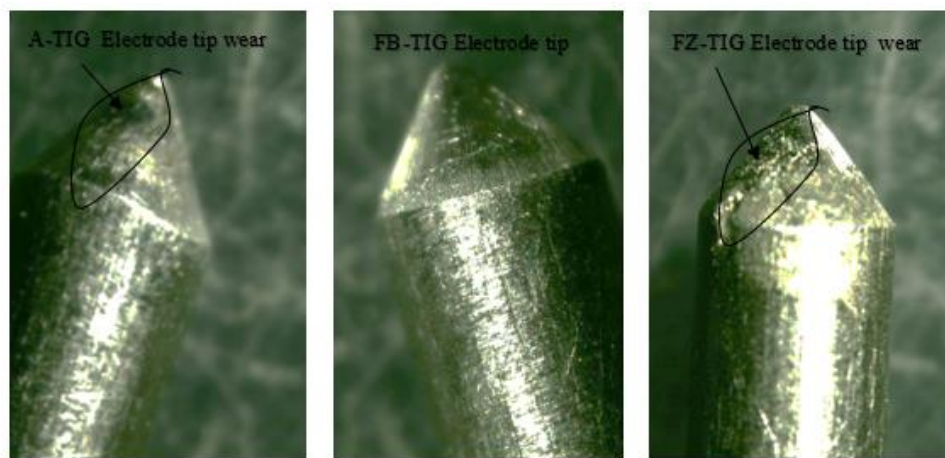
Electrode tip appearance after A-TIG, FB-TIG and FZ-TIG welding
